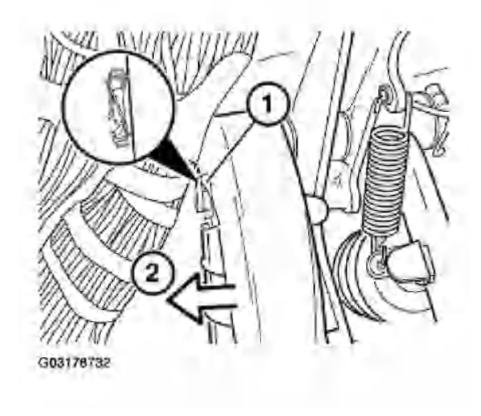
Removing Locking Clip For Clutch Pedal Courtesy of BMW OF NORTH AMERICA, INC.
